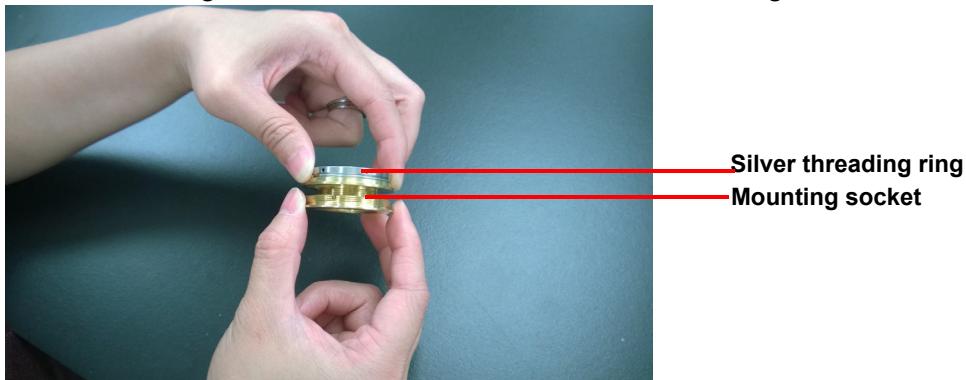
Separate the piezo scanner mounting socket and threading ring.
